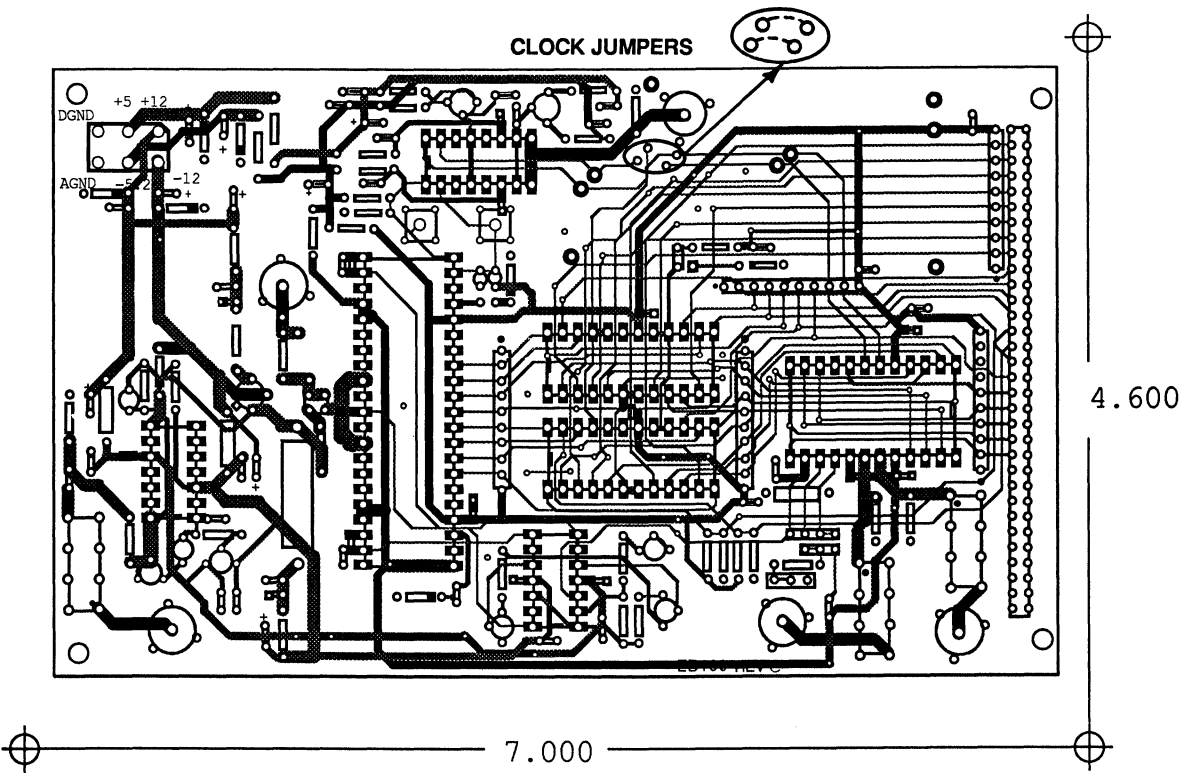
A - MAIN BOARD LAYOUT AND COMPONENT POSITION
